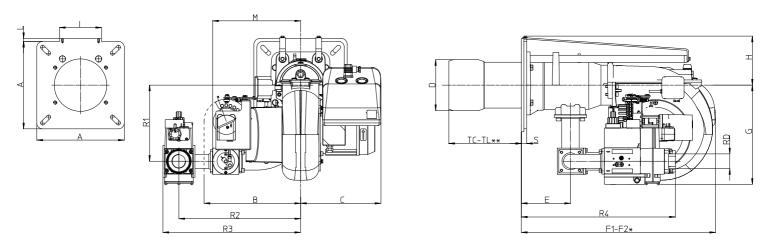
Dimensions GAS P70/MCE - GAS P100/MCE
